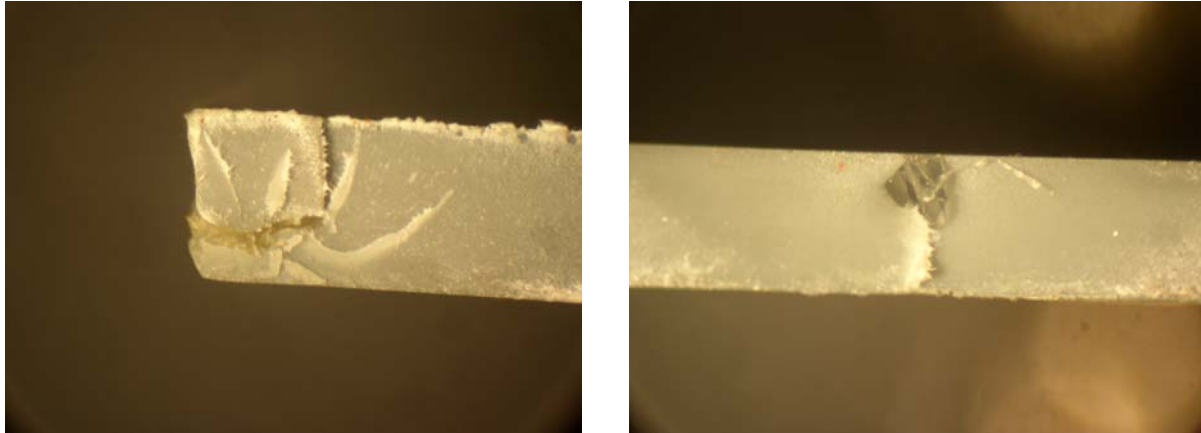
BAM Test Fracture Surfaces for Failure Times of 11 and 133 Hours (Unfiltered)
